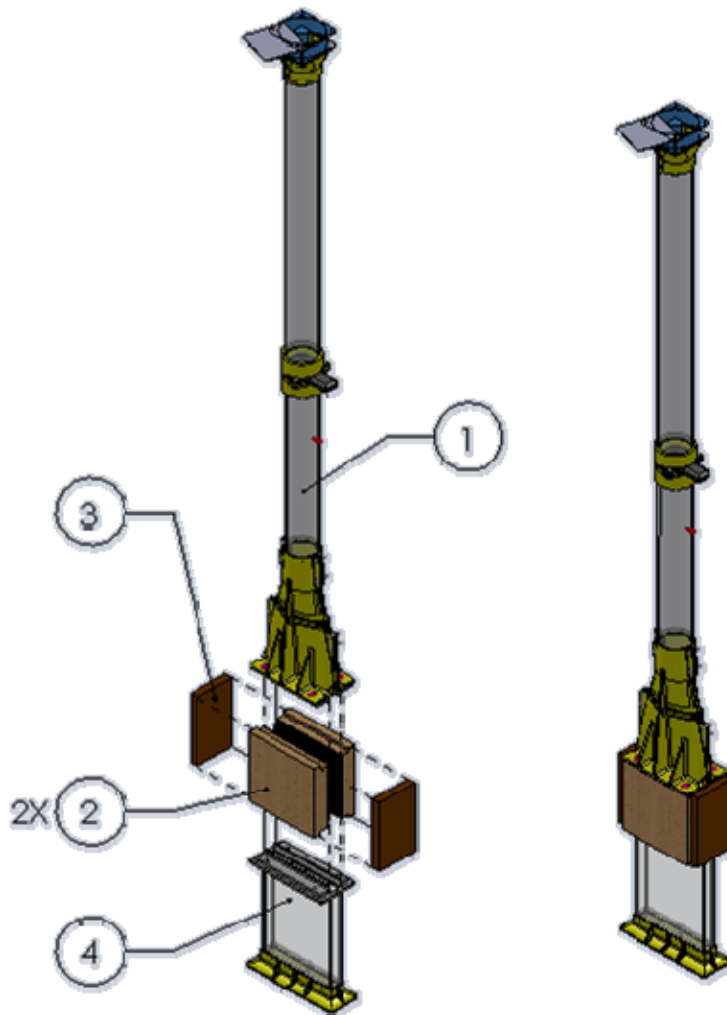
Overall Testing Rig Assembly. Subassembly descriptions are listed below.
